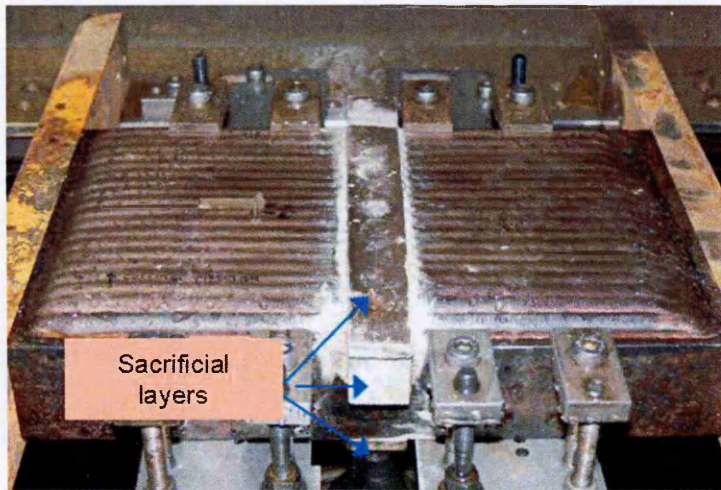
The clad plate mounted on the WEDM table showing sacrificial plates attached to the component and the clamping arrangement.
